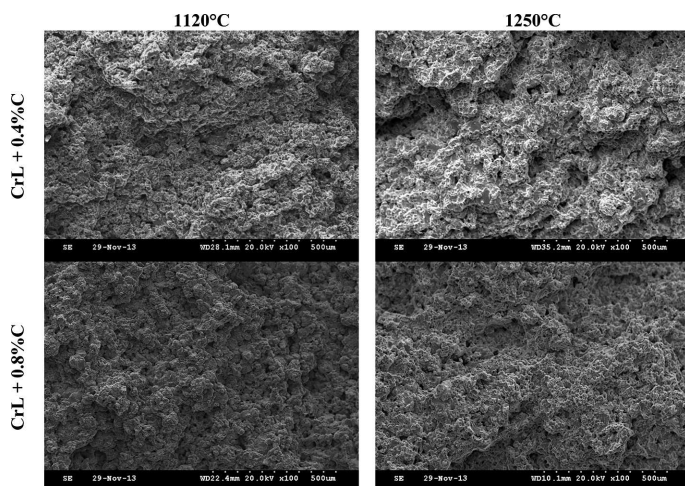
The fracture surfaces of PM steels based on Astaloy CrL pre-alloyed powder (SEM)
